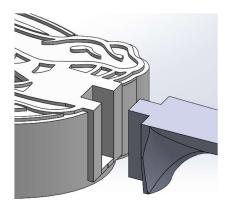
Neck and body with alignment extrusions between the two pieces. Tolerances finalized at 0.2 mm.
